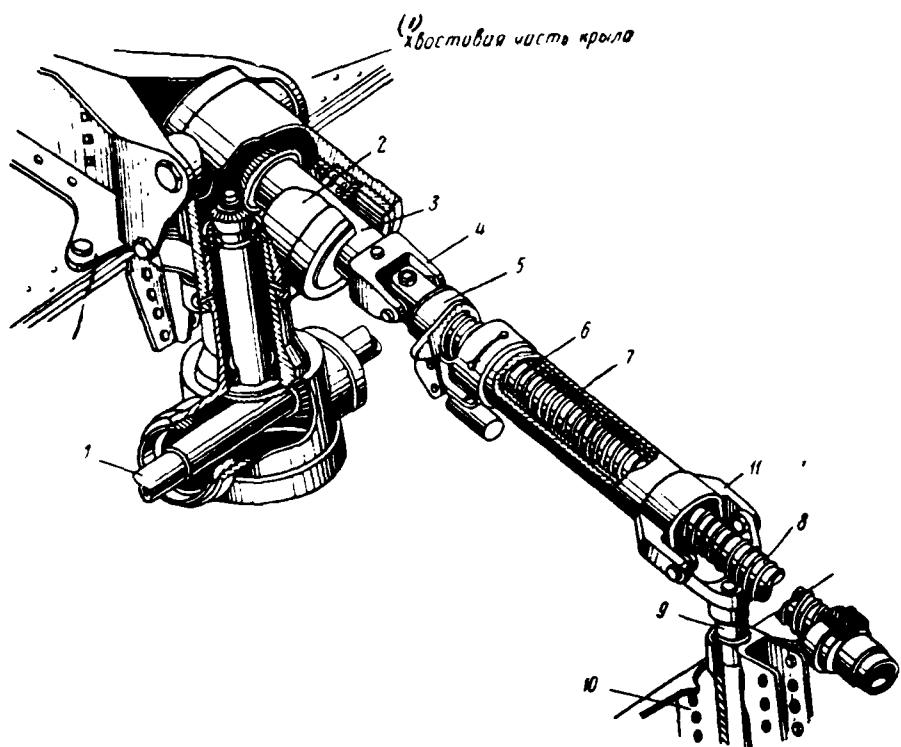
Screw mechanism of flap control of aircraft Il-18: 1 - shaft of transmission; 2 - reducer; 3 - output shaft of reducer; 4 - universal joint; 5 - detent; 6 - balls/spheres; 7 - nut-slider; 8 - screw; 9 - pin; 10 - supporting unit; 11 - end/face of nut.
